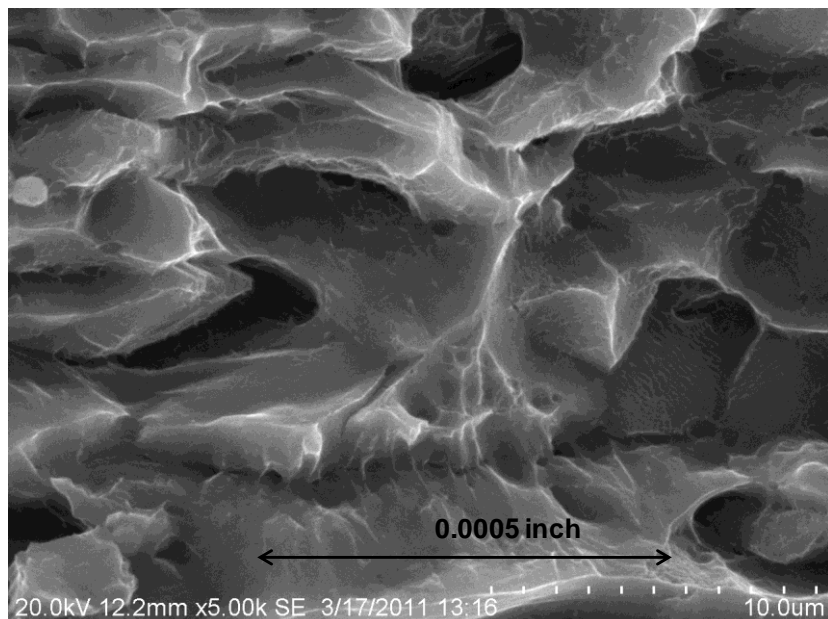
Fracture Surface from Specimen LIP1-05-325 (lot 400751) that was Aged at 325°F for 24 hours
